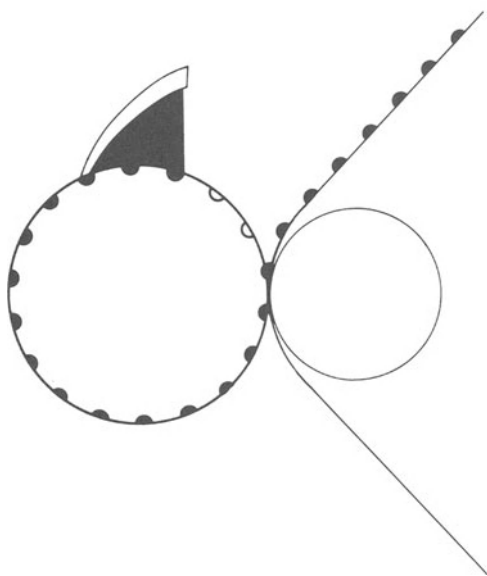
Rotogravure printing. (Courtesy Rototherm Company, California).
